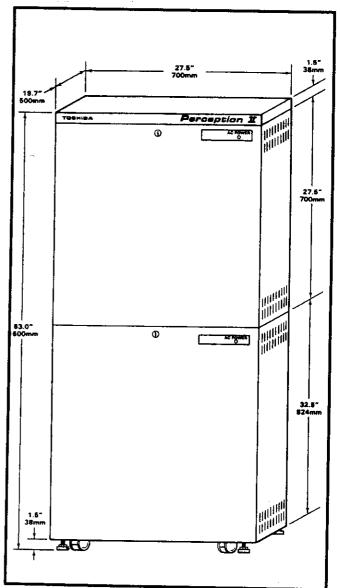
BASIC and EXPANSION CABINETS (Dimensions)
